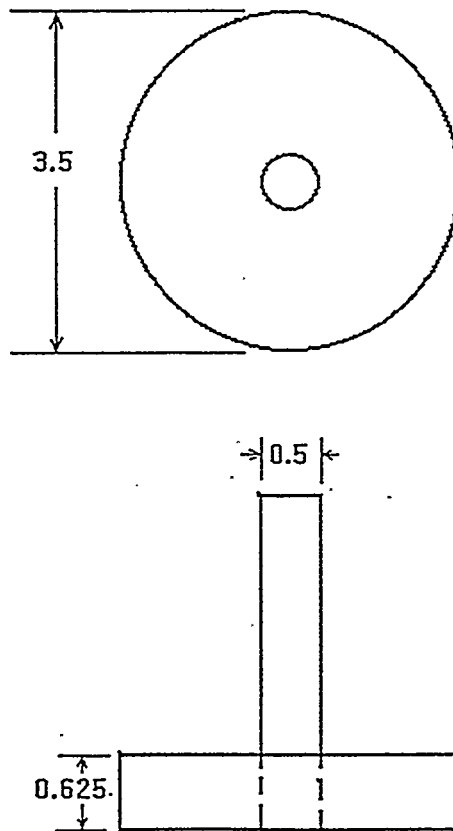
Spin Test Specimen Blanks (Dimensions in Inches)
